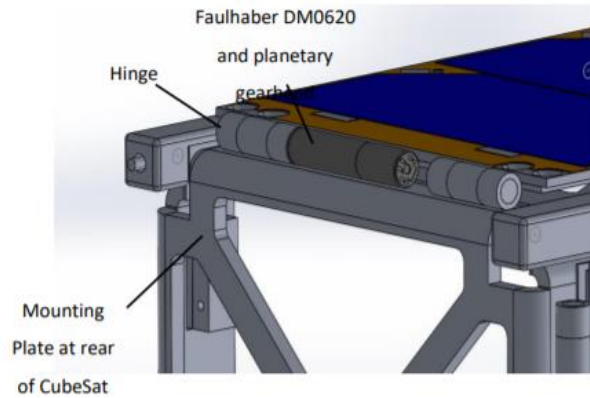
The geared stepper motor and hinge mechanism designed to enable solar panel reconfiguration.
